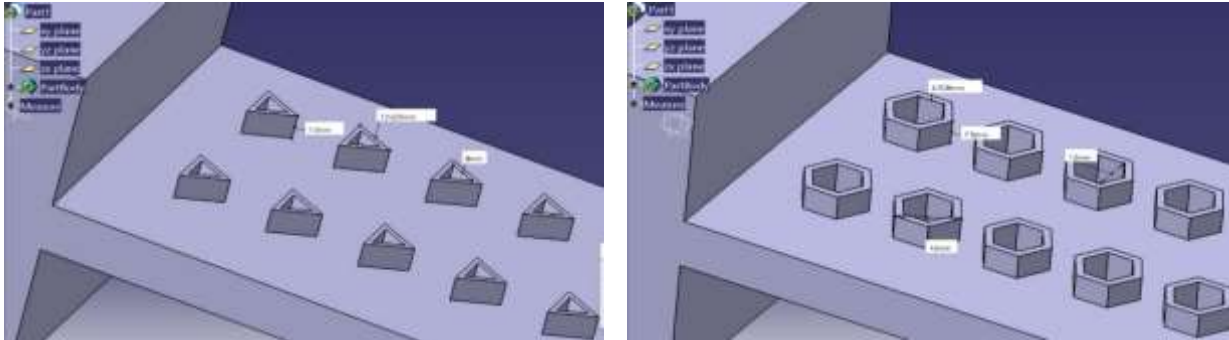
Geometric dimension of perforated triangular and hexagonal shape on rectangular fin surface
